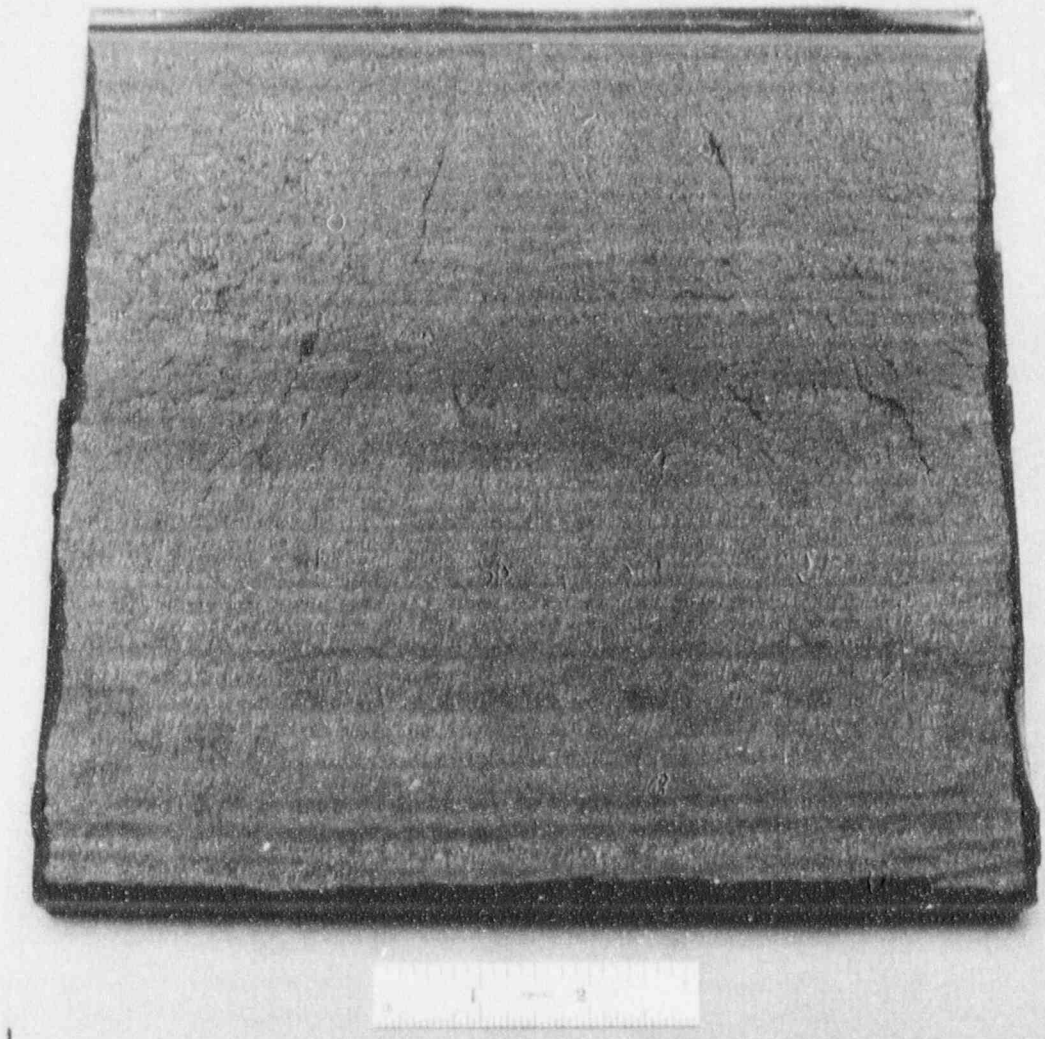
Fracture surface of full-thickness clad beam specimen CB-2
